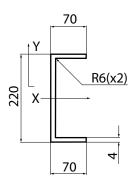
Cross section of vehicle chassis frame beam (all dimensions expressed in millimetres)
